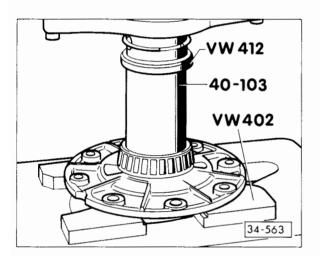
Heat inner race of tapered roller bearing to about 100° C, install and press home
